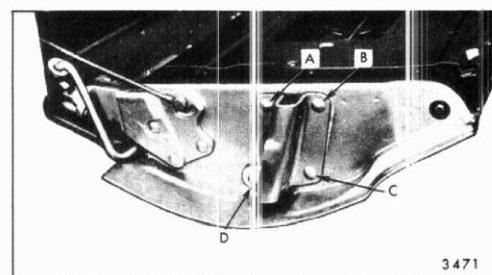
Dual Acting Tail Gate Left Upper Hinge and Lock Assembly - "B" Body Shown - "A" Body typical
